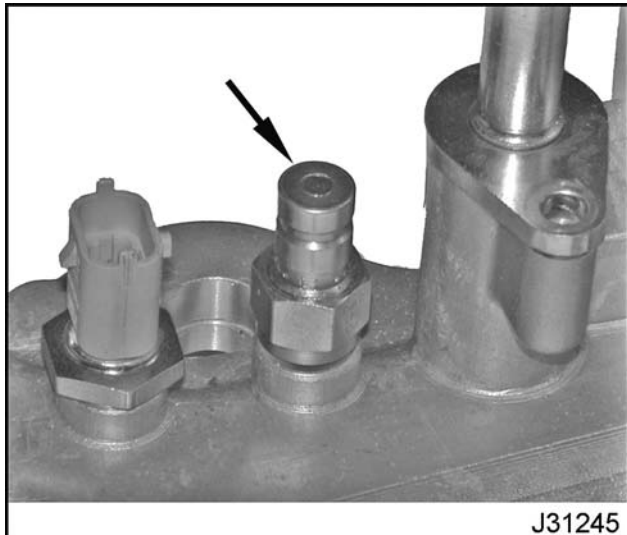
Fuel Pressure Test Fitting installed in EOP switch port
